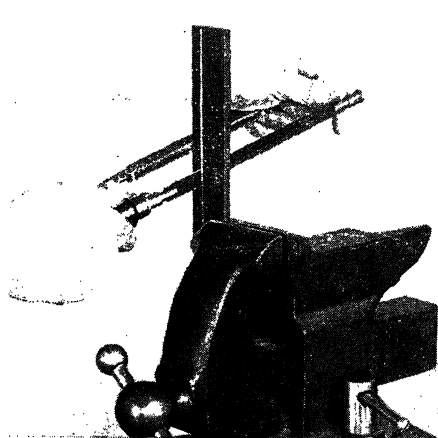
The blade is clamped at right angles to the frame for making long cuts as shown
